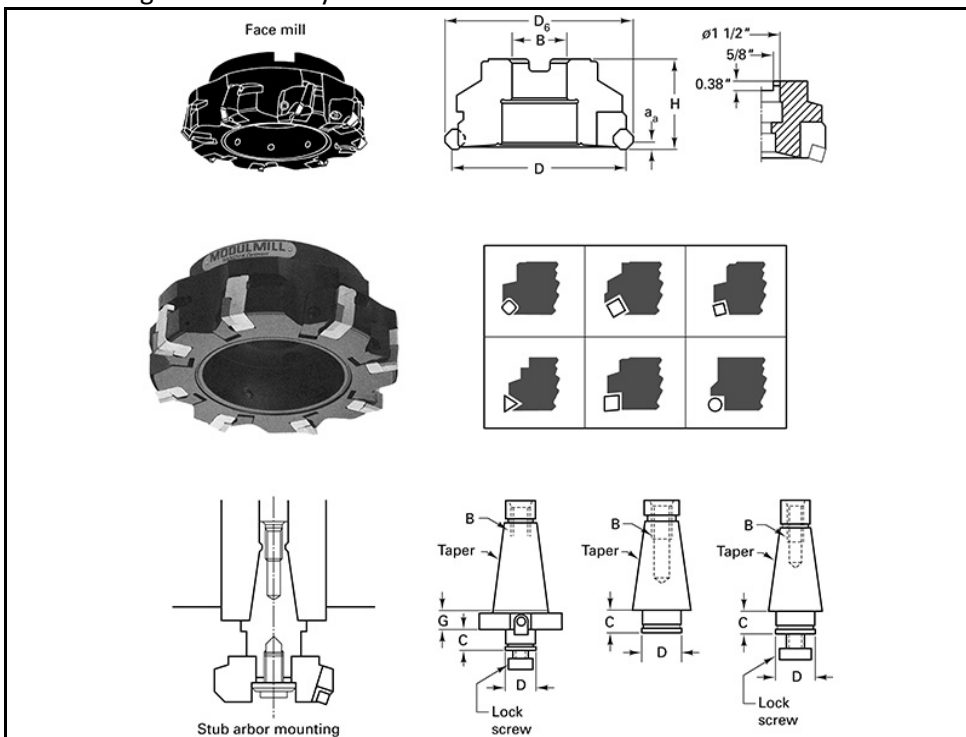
FIGURE Face mills come in many different designs using many different insert geometries and different mounting arbors.
